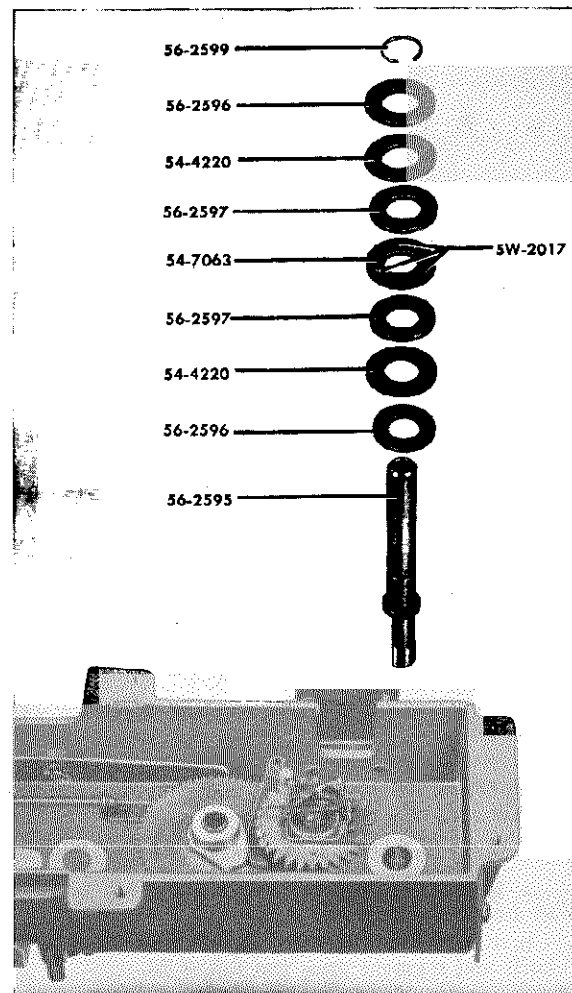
DISASSEMBLY OF TURNTABLE SHAFT AND BEARINGS.
